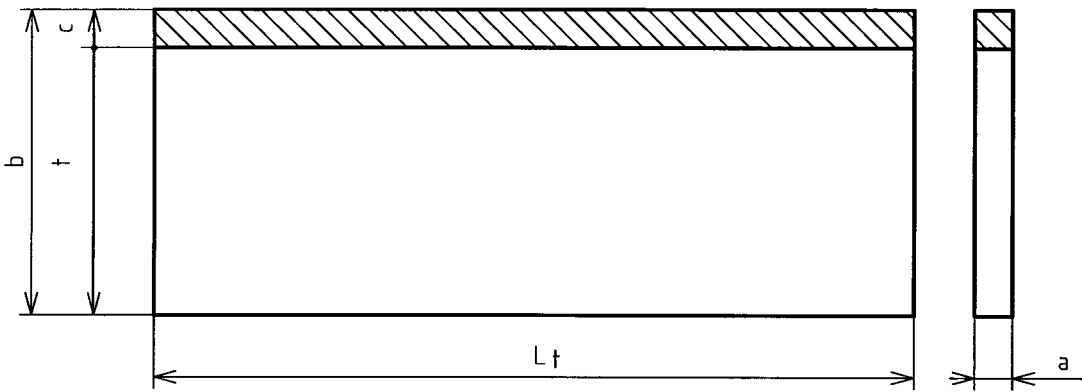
Side bend test specimen of cladding without a butt weld (SBC)
